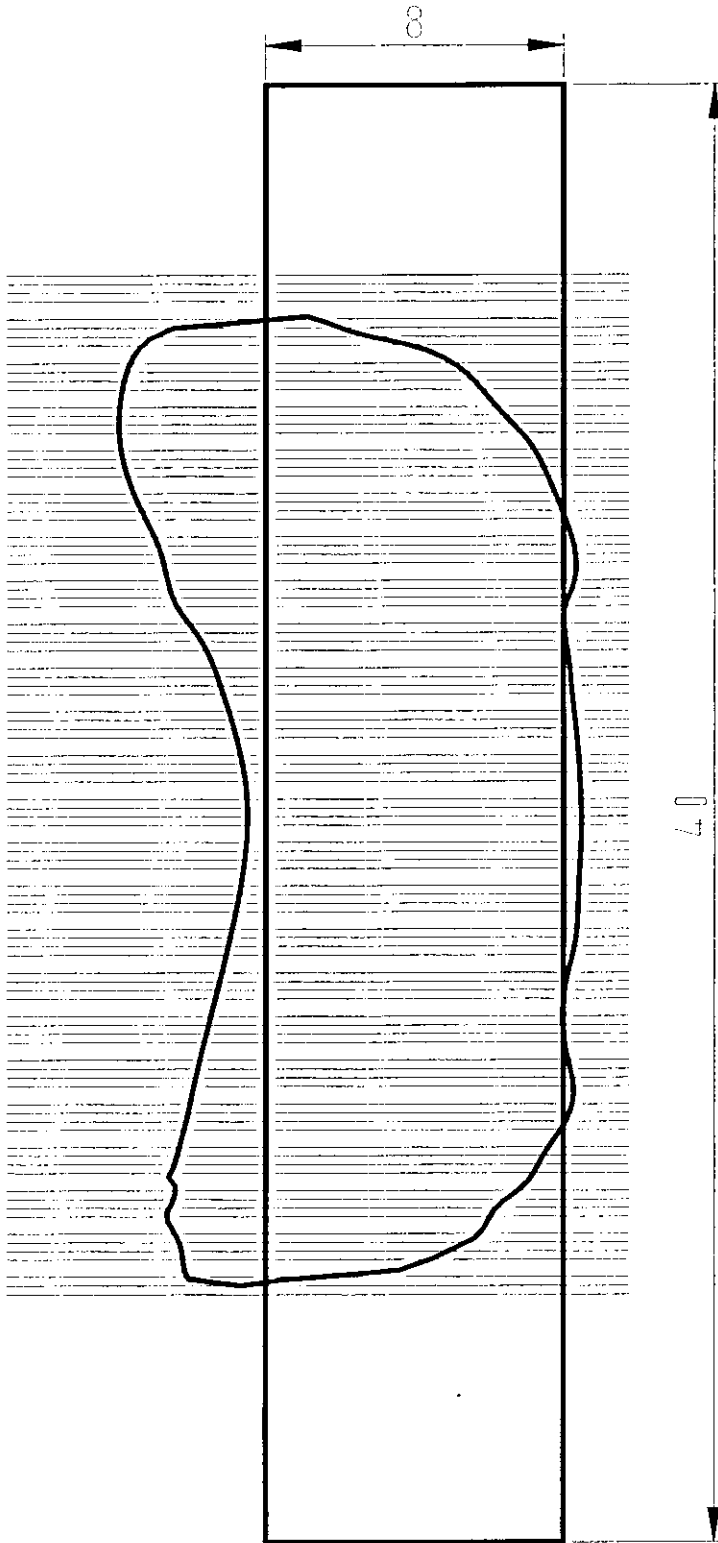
Sectional view of the inverted tube showing original and final thickness (dimensions are in mm)
